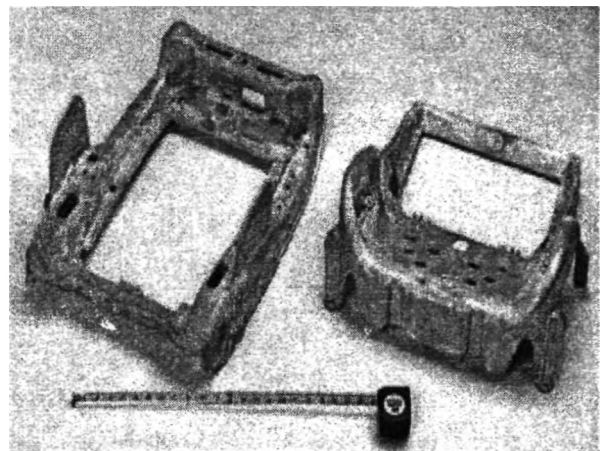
A magnesium seat pan shows how complex, lightweight low pressure die cast components can improve production by replacing multiple pieces.
